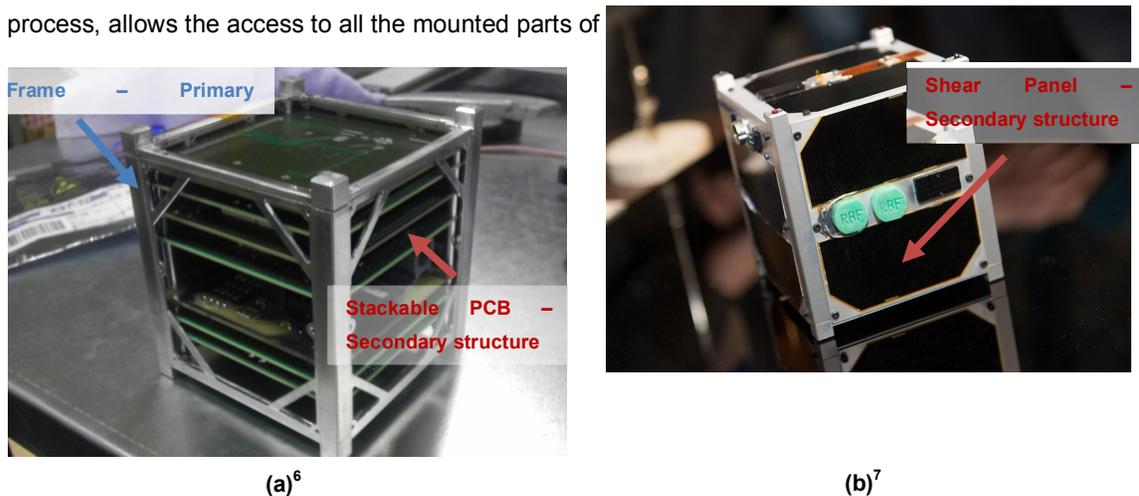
CubeSat internal mounted structure (a) and external assembled structure (b)
